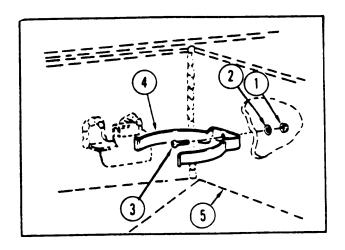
4. Trailer Spring Tension Clip (ARMY)
